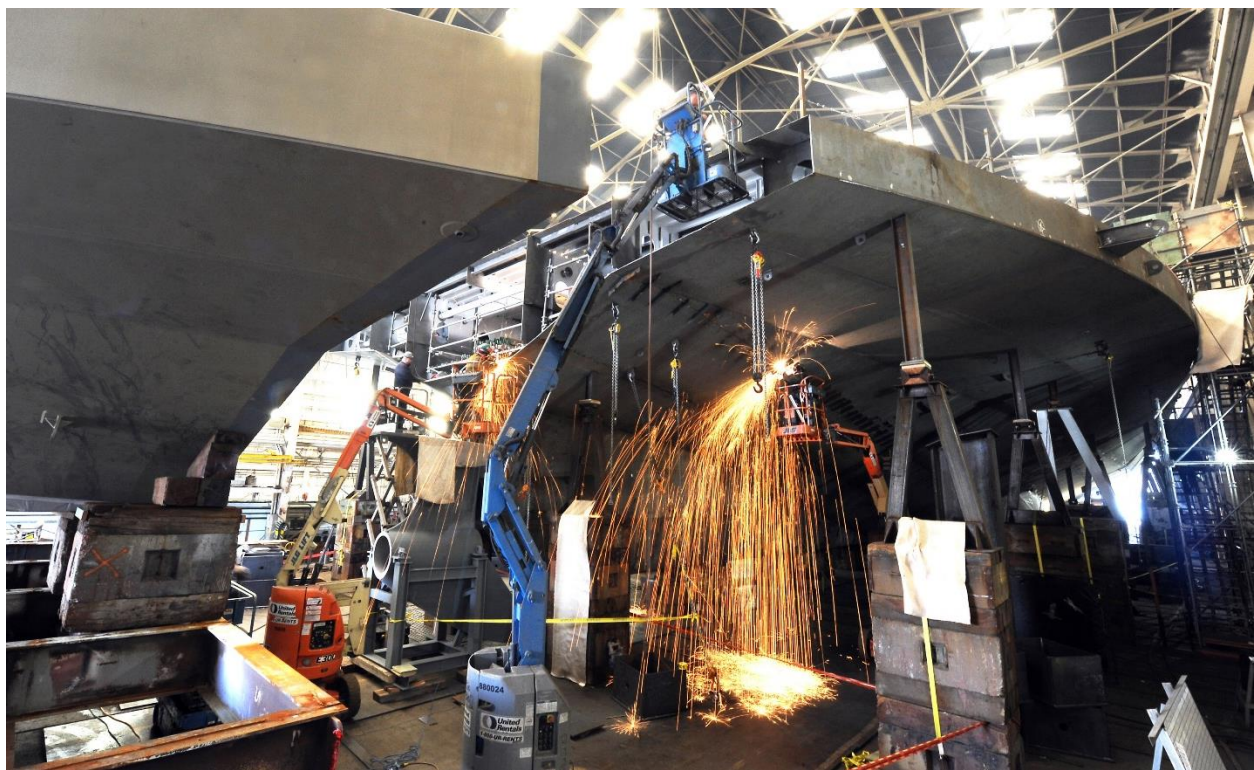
, Vigor shipyard workers building a WSF vessel. Photo courtesy of Vigor.
